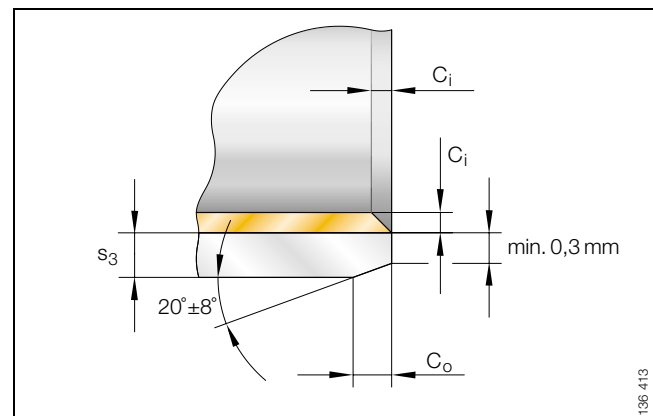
· Outer chamfer C_o and inner edge break C_i for metric sizes
